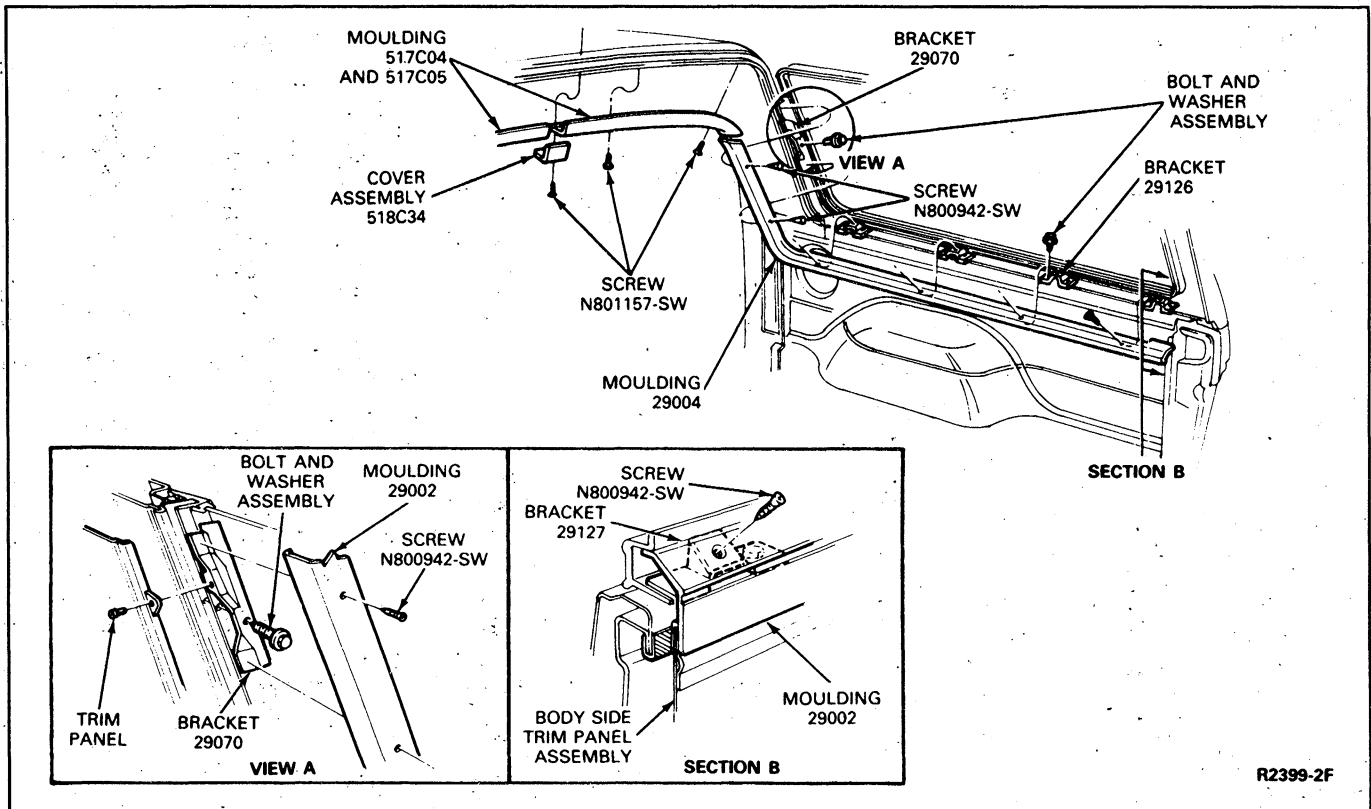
Body Side and Roof Rear Garnish Mouldings—Bronco
